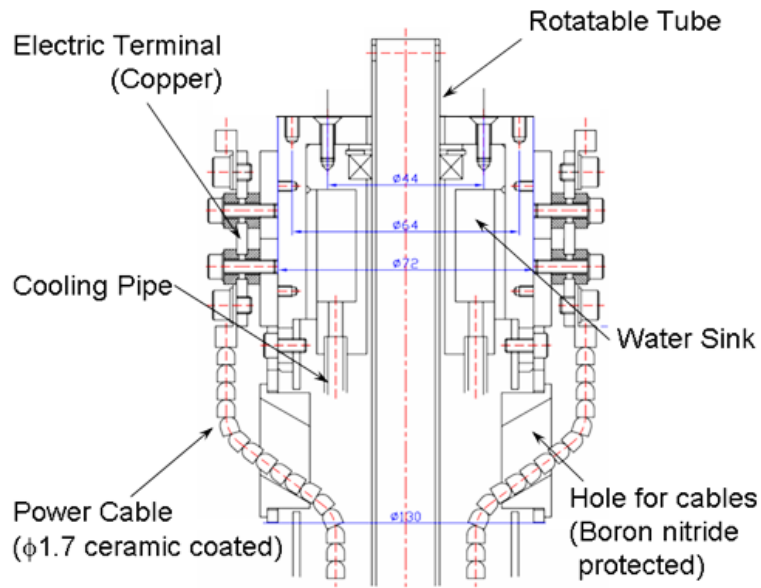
Side view of the configuration of the top of the movable rod installed in 4.5-L port.
